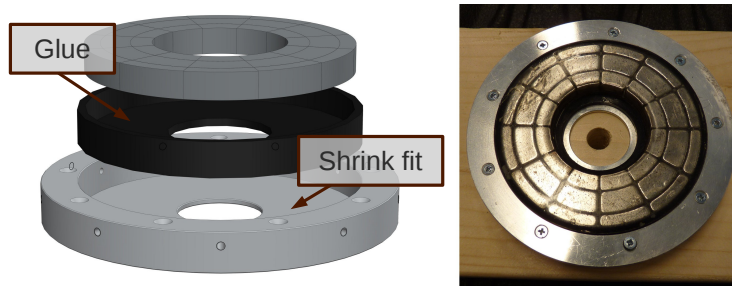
Construction of one Halbach array. The magnets were glued to each other and to a plastic cup using Loctite 496. Further, an aluminum holder was shrink-fitted onto the cup by heating it to 175°C. A CAD drawing describing the assembly process can be seen to the left. The finished unit can be seen on the right.
